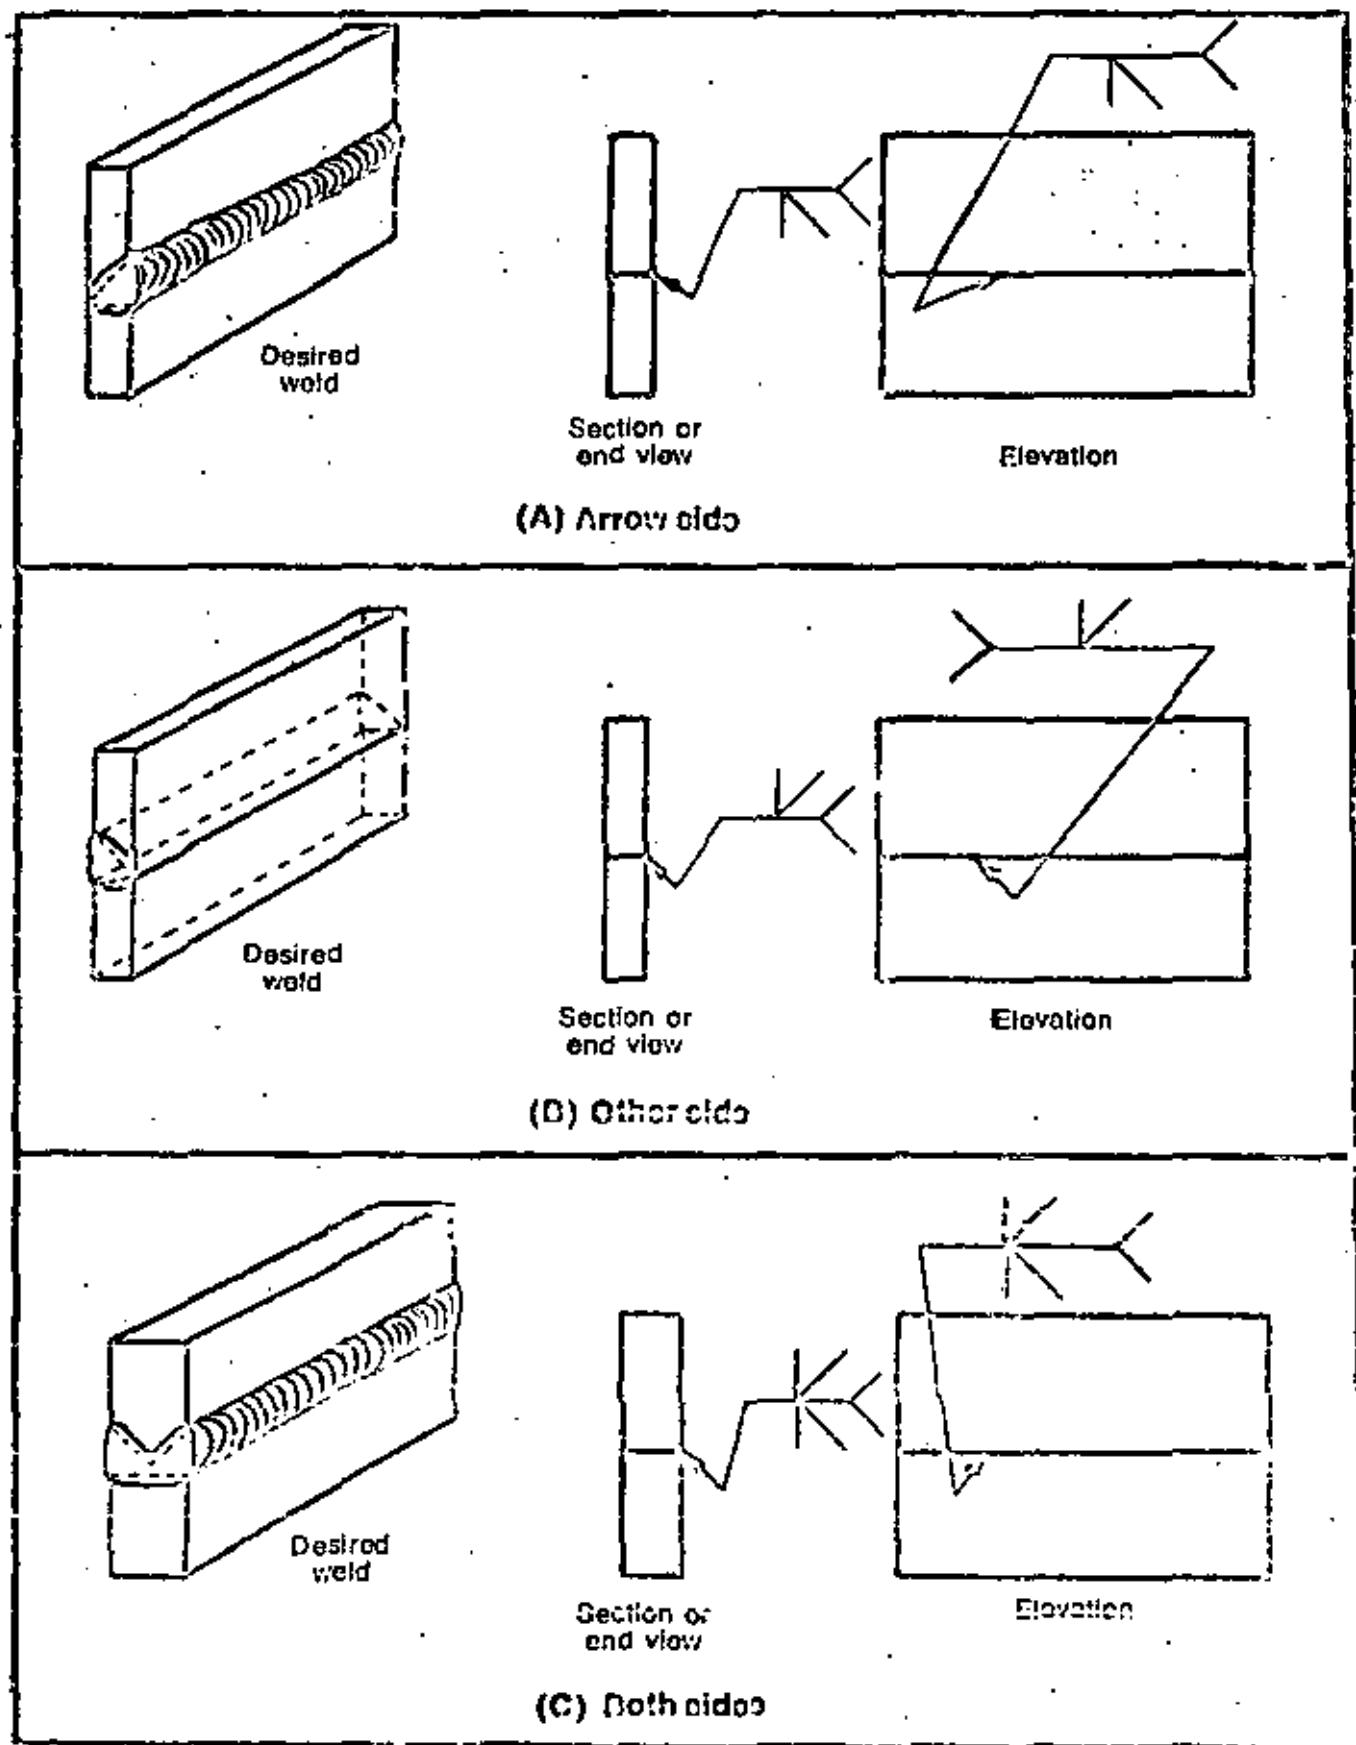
Application of break in arrow of welding symbol (L-groove weld).
